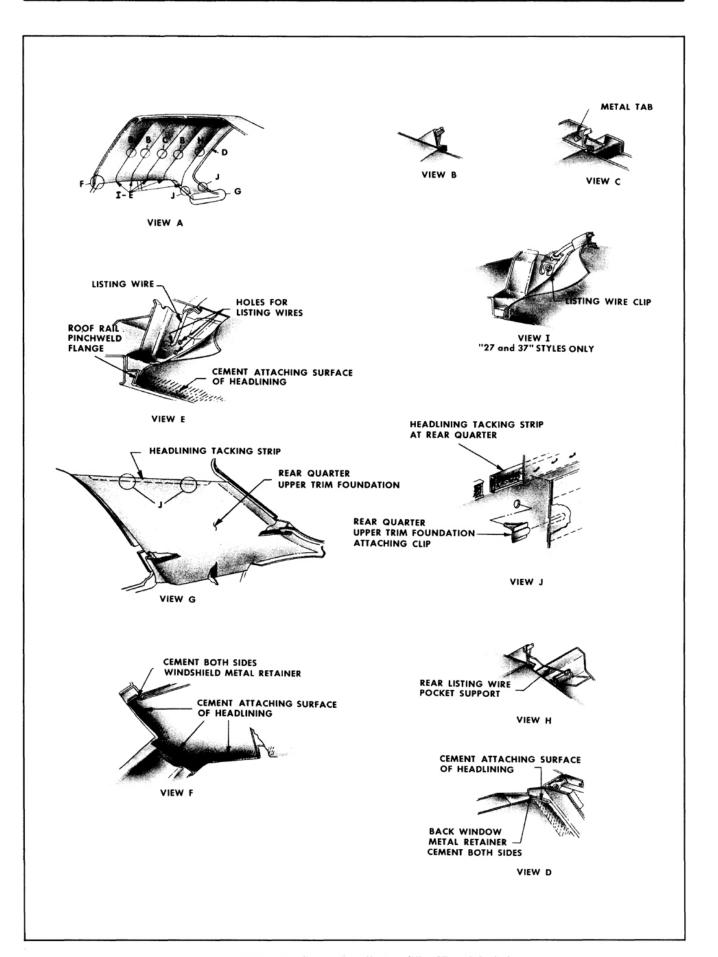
Headlining Installation (27 - 37 - 69 Styles)
